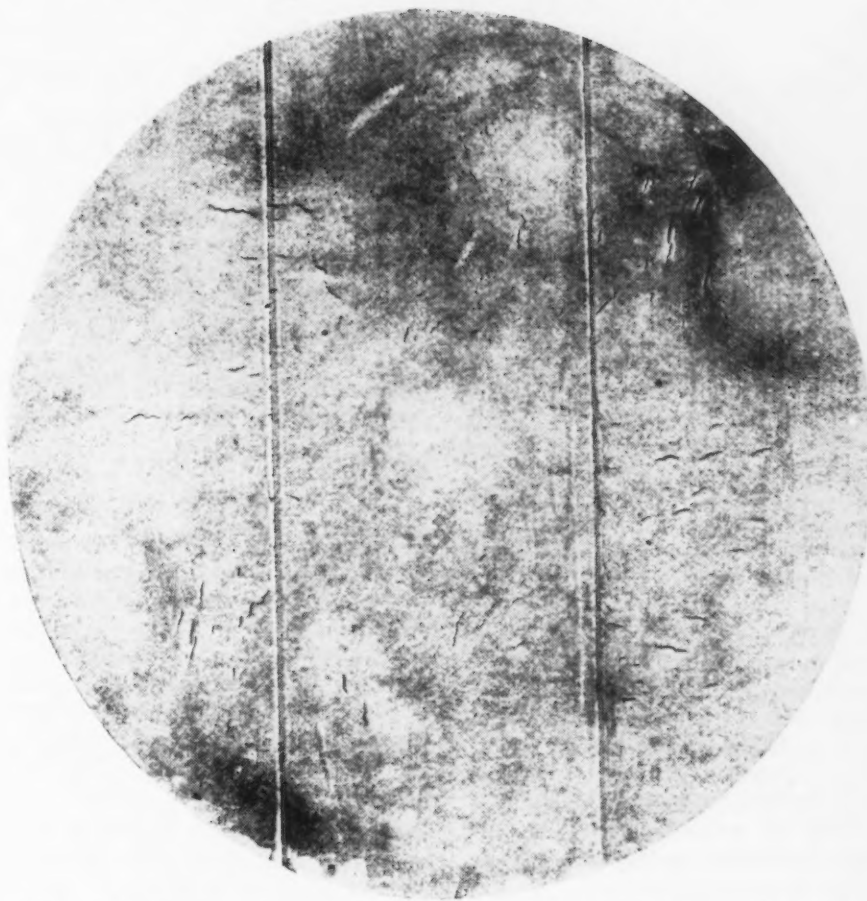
A photographic reproduction of a steel part showing the cracks disclosed by magnetic testing.
